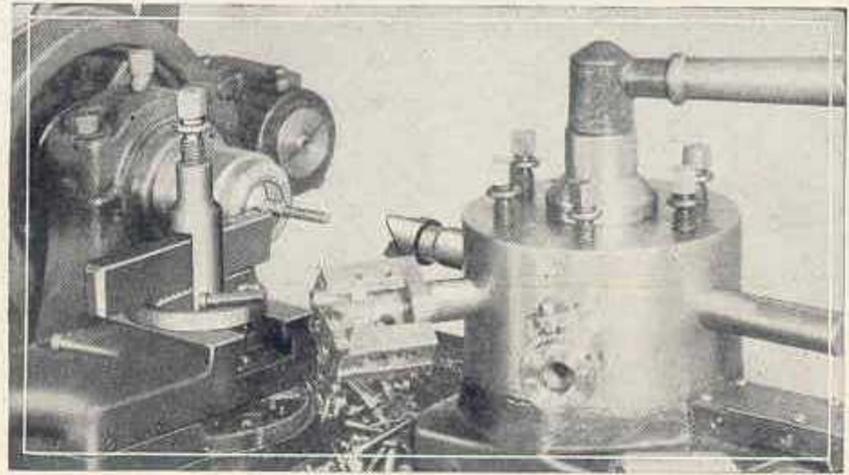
A 9-Inch Junior New Model Lathe Fitted with Draw-In Collet Chuck and Round Tool Post Turret.
